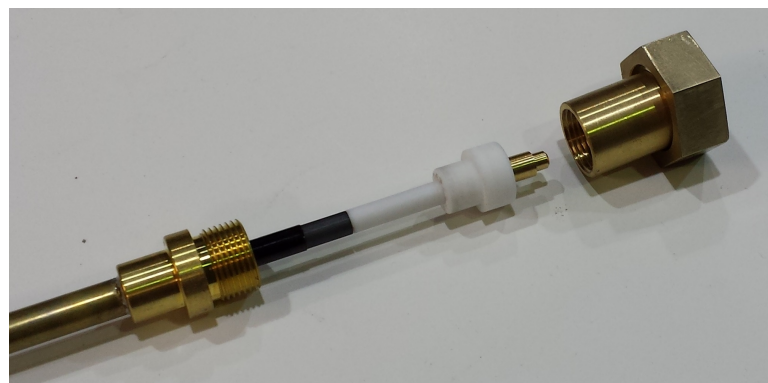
Breakdown of NLTL assembly: from left to right outer shell, polyimide sleeve, teflon spacer, IC, 7/16 housing and nut.
